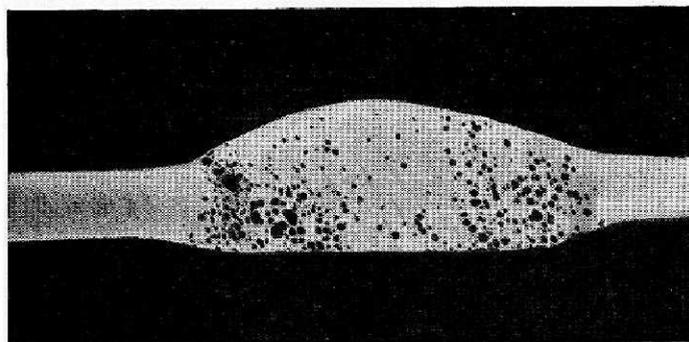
(9534) — MACRO-SECTION OF ARGON ARC WELD IN MONEL, USING NORMAL MONEL AS FILLER WIRE ($\times 10$)
